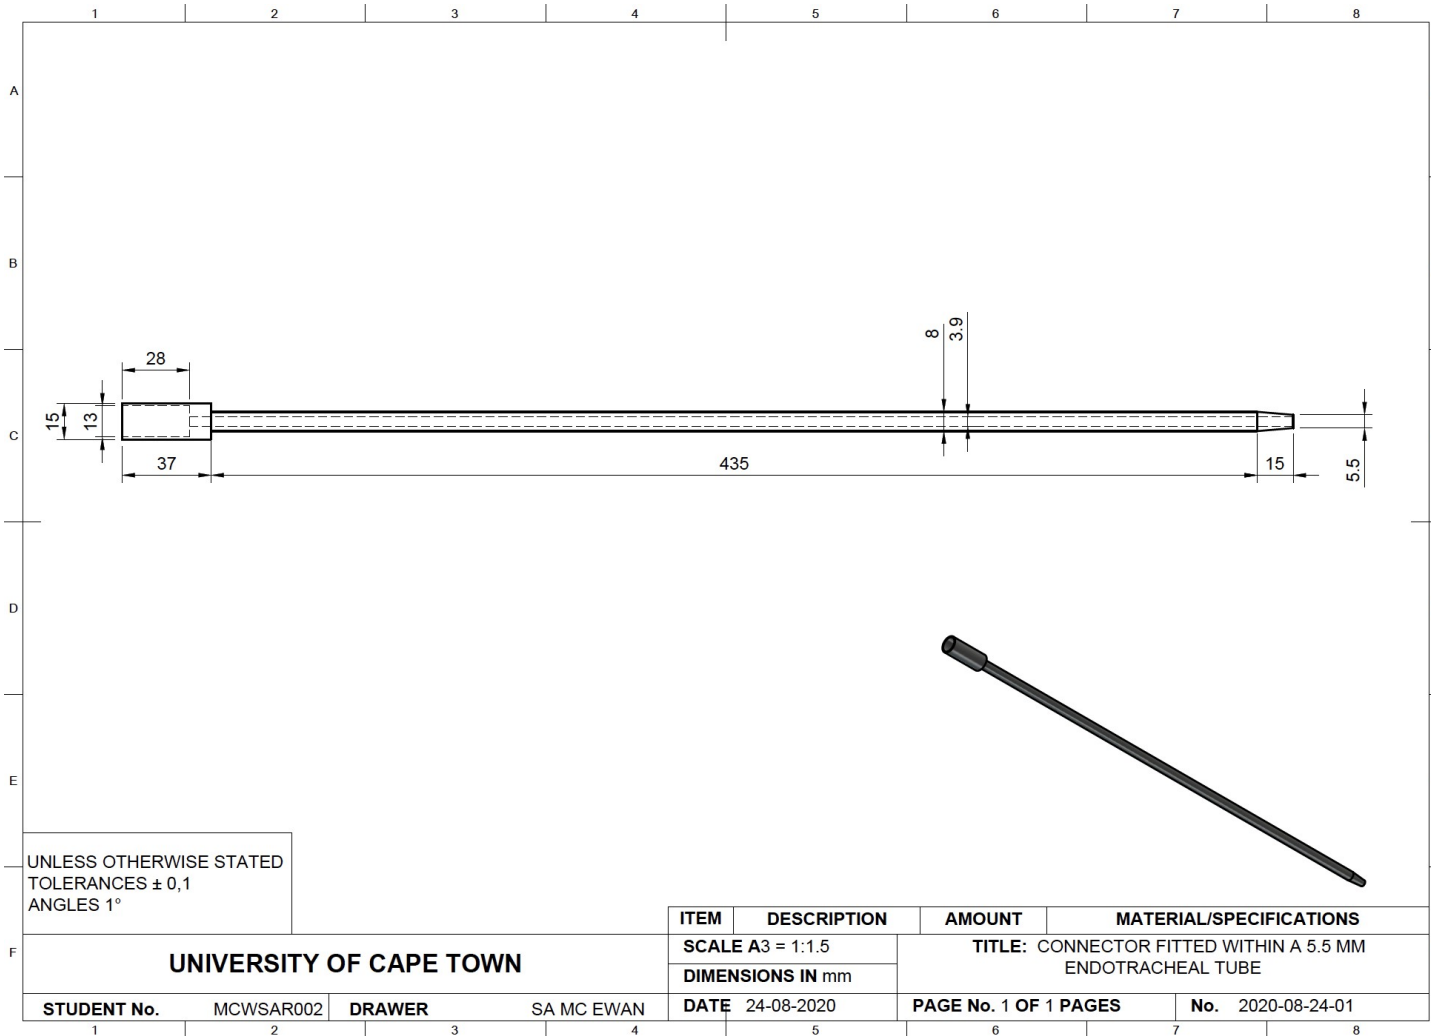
Mechanical manufacturers drawings of the ventilation connector tube
